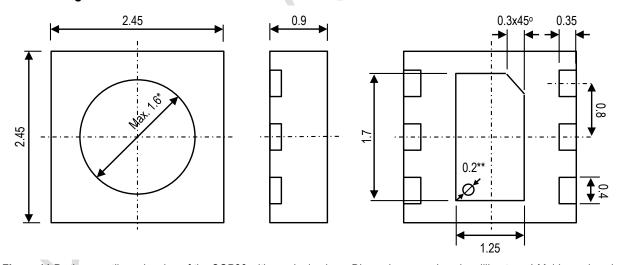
Package outlines drawing of the SGP30 with nominal values. Dimensions are given in millimeters. * Mold opening shows a smooth transition to package surface.  The die pad shows a small recess in the bottom left part. *, These dimensions are not well defined and given as a reference only.
